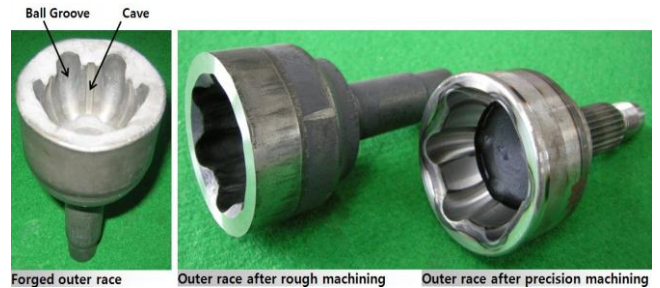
Examples of outer race using multi-stage warm forging and machining processes
